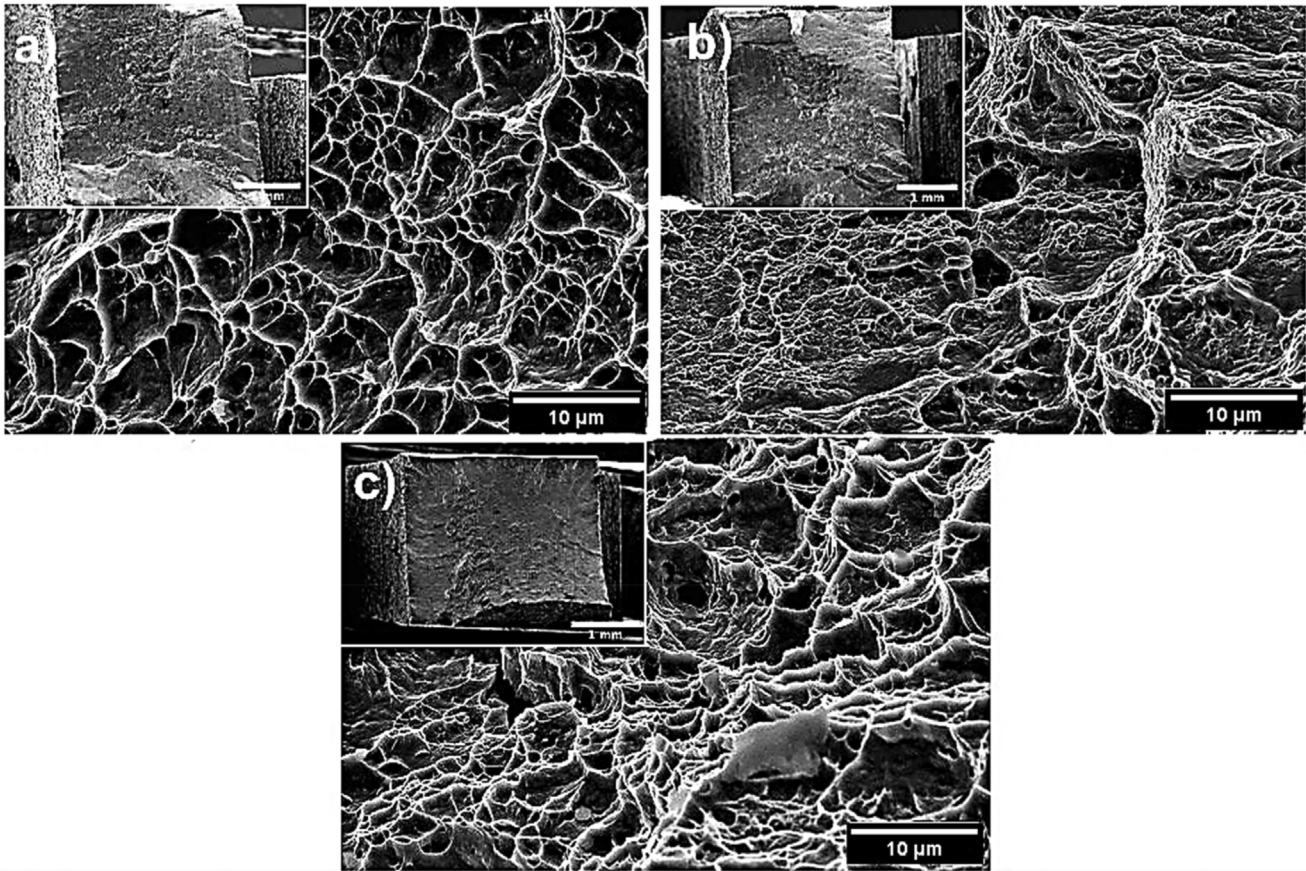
Fracture surfaces of the fractured tensile test specimens (a) as-received, (b) 50%, and (c) 70% cold-rolled.
